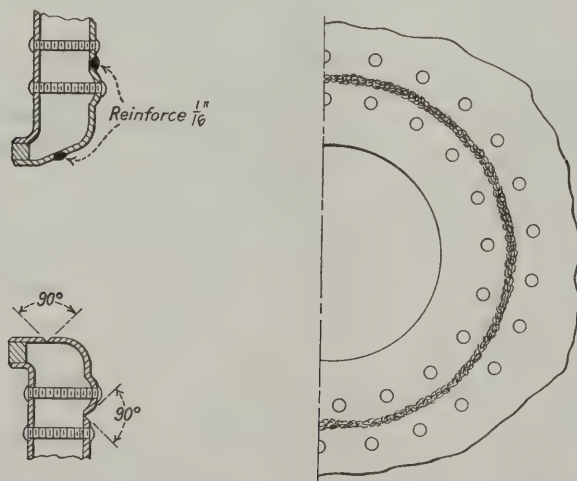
Butt Welded Fire Door Patch; Gas or Electric
